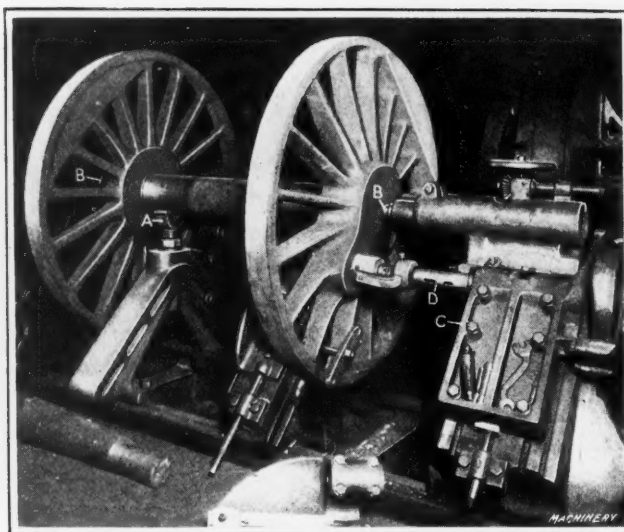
Quartering Machine equipped for re-turning Crankpins of Driving Wheels
